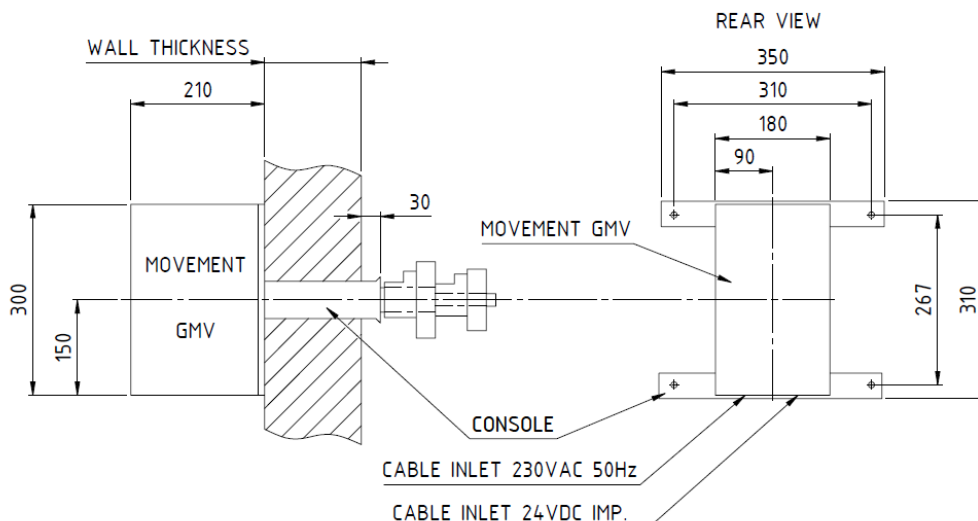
Sketch GMV Rec. drill-hole for hand shaft: $\varnothing 75$ mm
